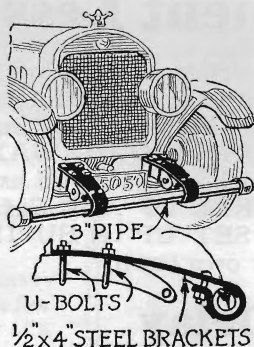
A homemade bumper can be constructed from a three-inch iron pipe and pieces of heavy strap iron
